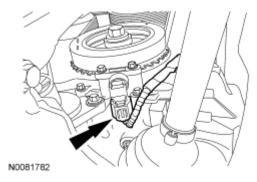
Locating CKP Sensor Bolts Courtesy of FORD MOTOR CO.
